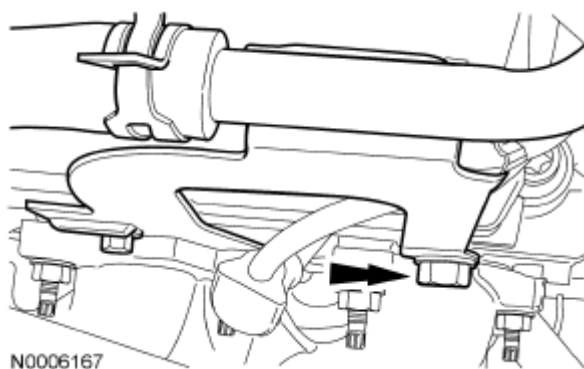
Locating Heater Hose Tube Bracket Front Bolt
